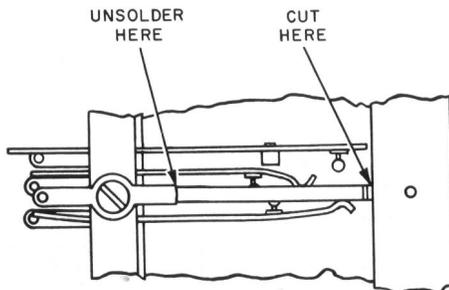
Points at Which to Cut and Unsolder Sleeve Terminals in 229-Type Jacks
